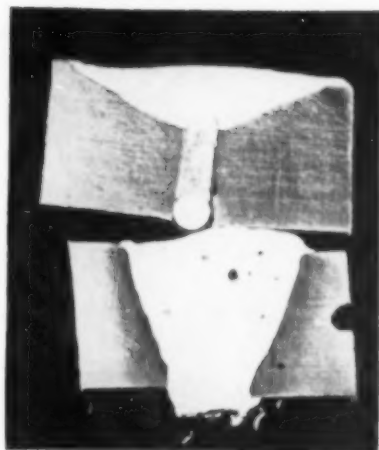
(Upper) — A Cross-Section of an Oxy-Acetylene Weld. (The white circular section appearing at the base of the weld is a piece of non-ferrous wire.) (Lower) A cross-section of a metallic arc weld made with a bare electrode of low carbon content. Both samples etched with alkaline chromate solution
